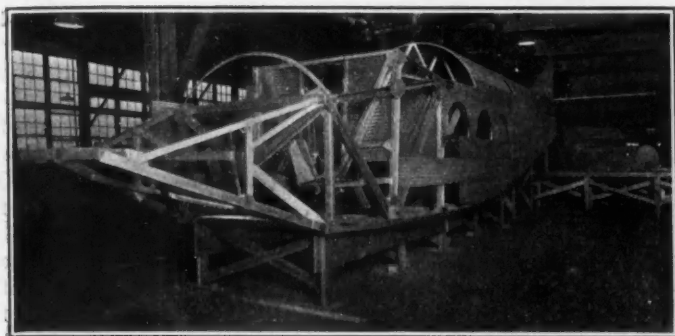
PARTLY COMPLETED FUSELAGE SHOWING THE ENGINE SUPPORT AND WING-SPAR ATTACHMENTS
